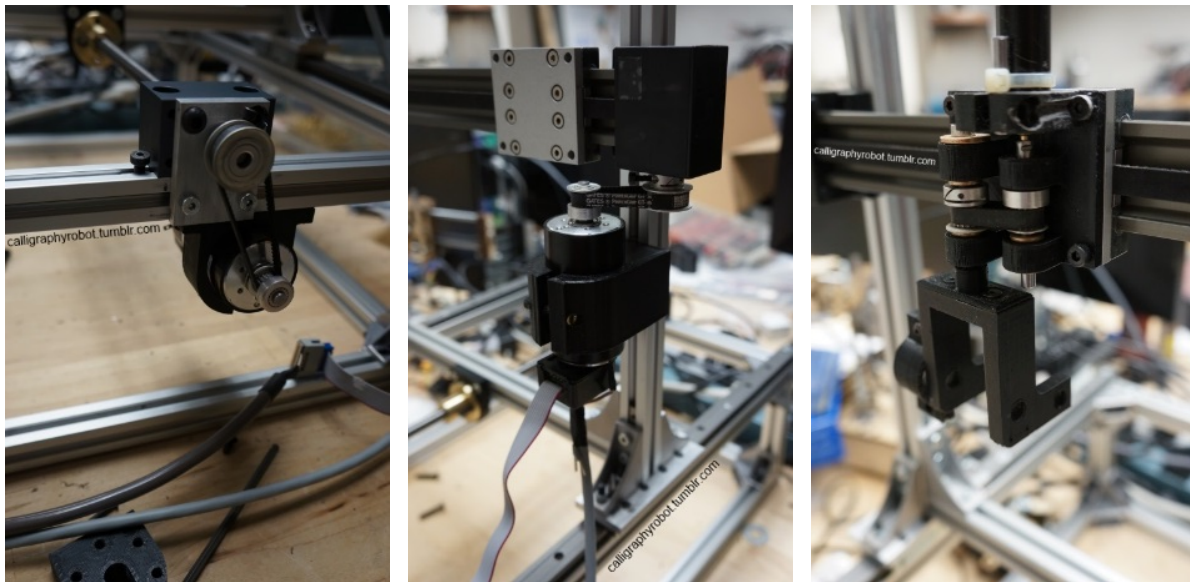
From left to right: the screw drive motor, the belt drive motor, and the rotation joint motor (with pen holder mounting bracket). All 3 are mounted with 3D printed clamps and connected to their axis via timing belts.
